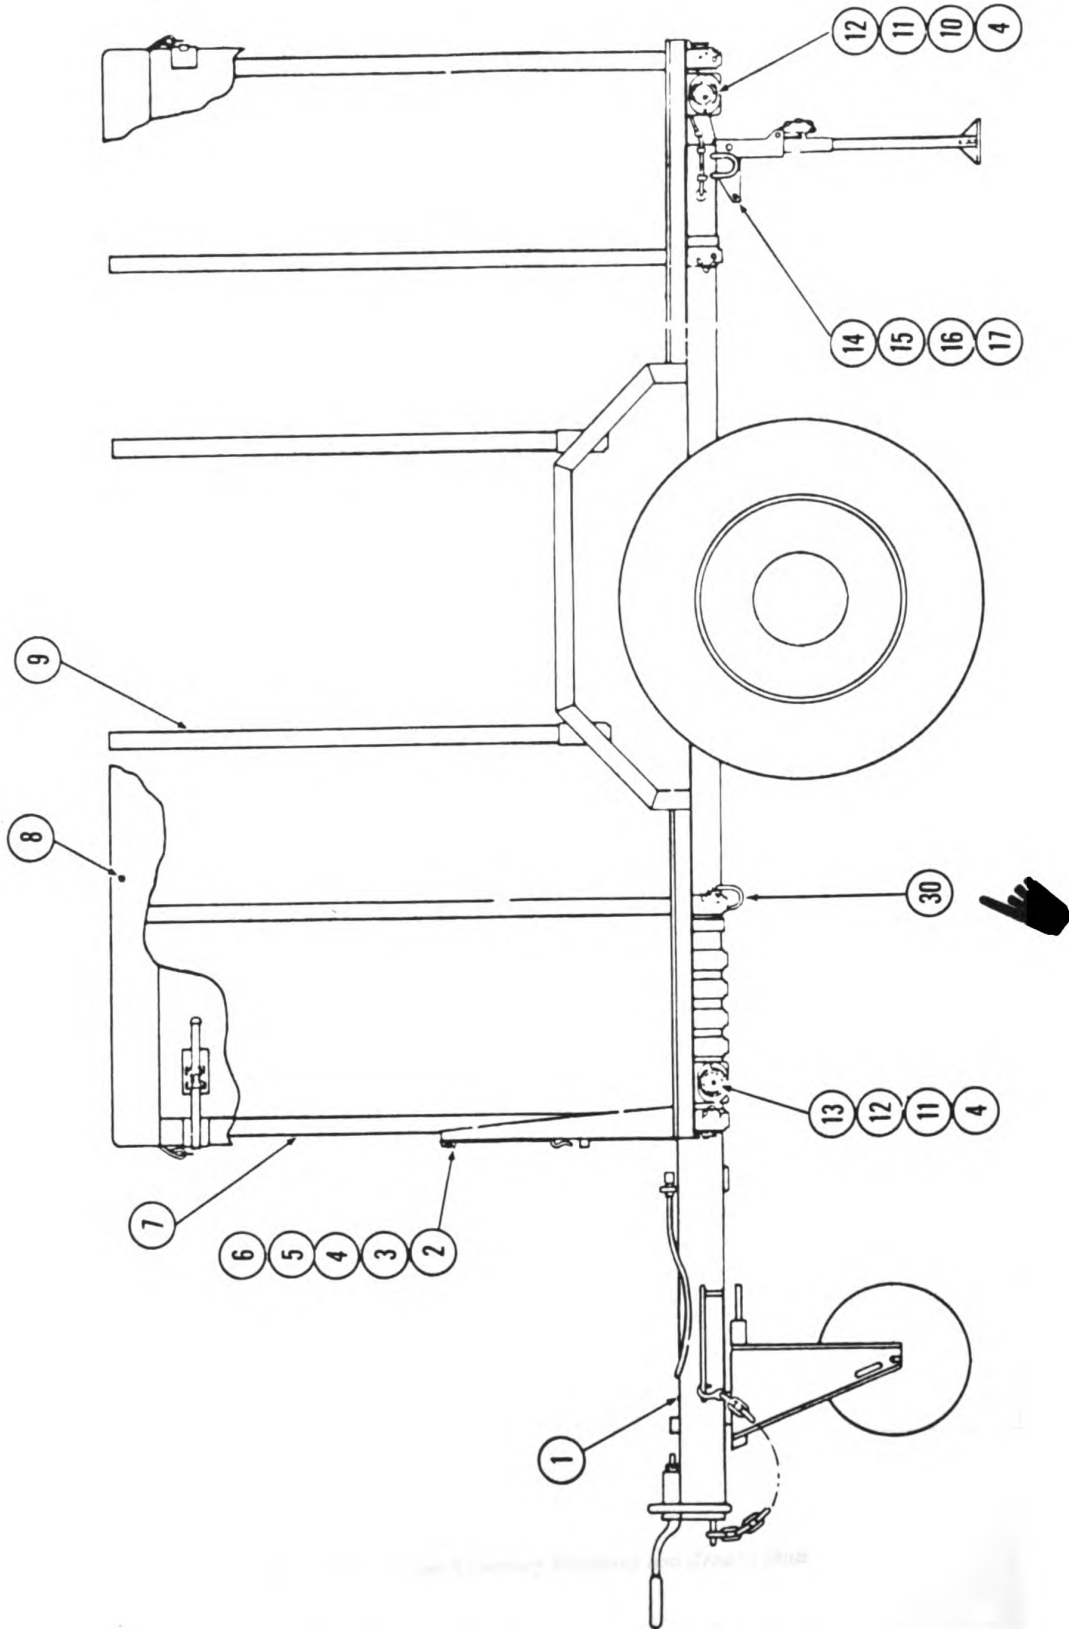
Trailer, Side, Top and Rear Views (Sheet 1 of 3)
